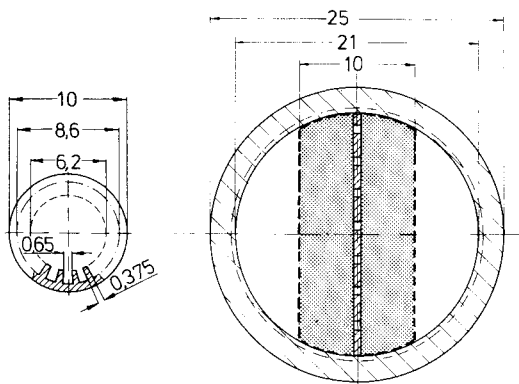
Cross section of axial-groove heat pipe and liquid trap (dimensions in mm).
